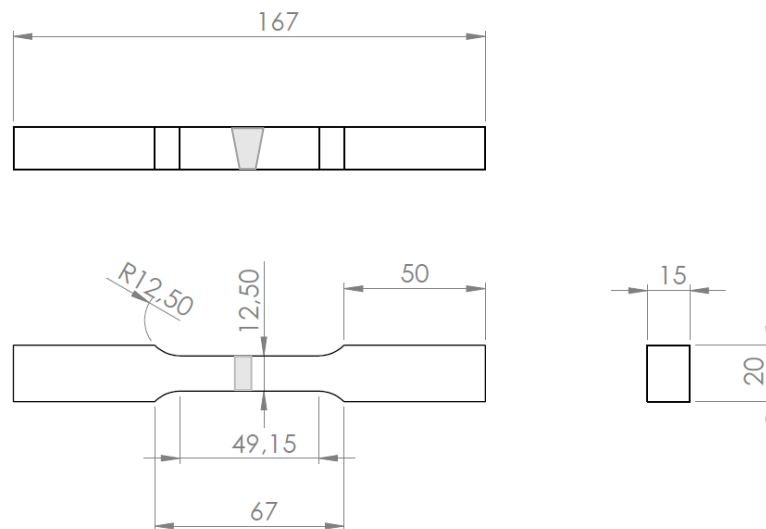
Design drawing of the tensile specimen. Weld contour is marked with a grey area.
